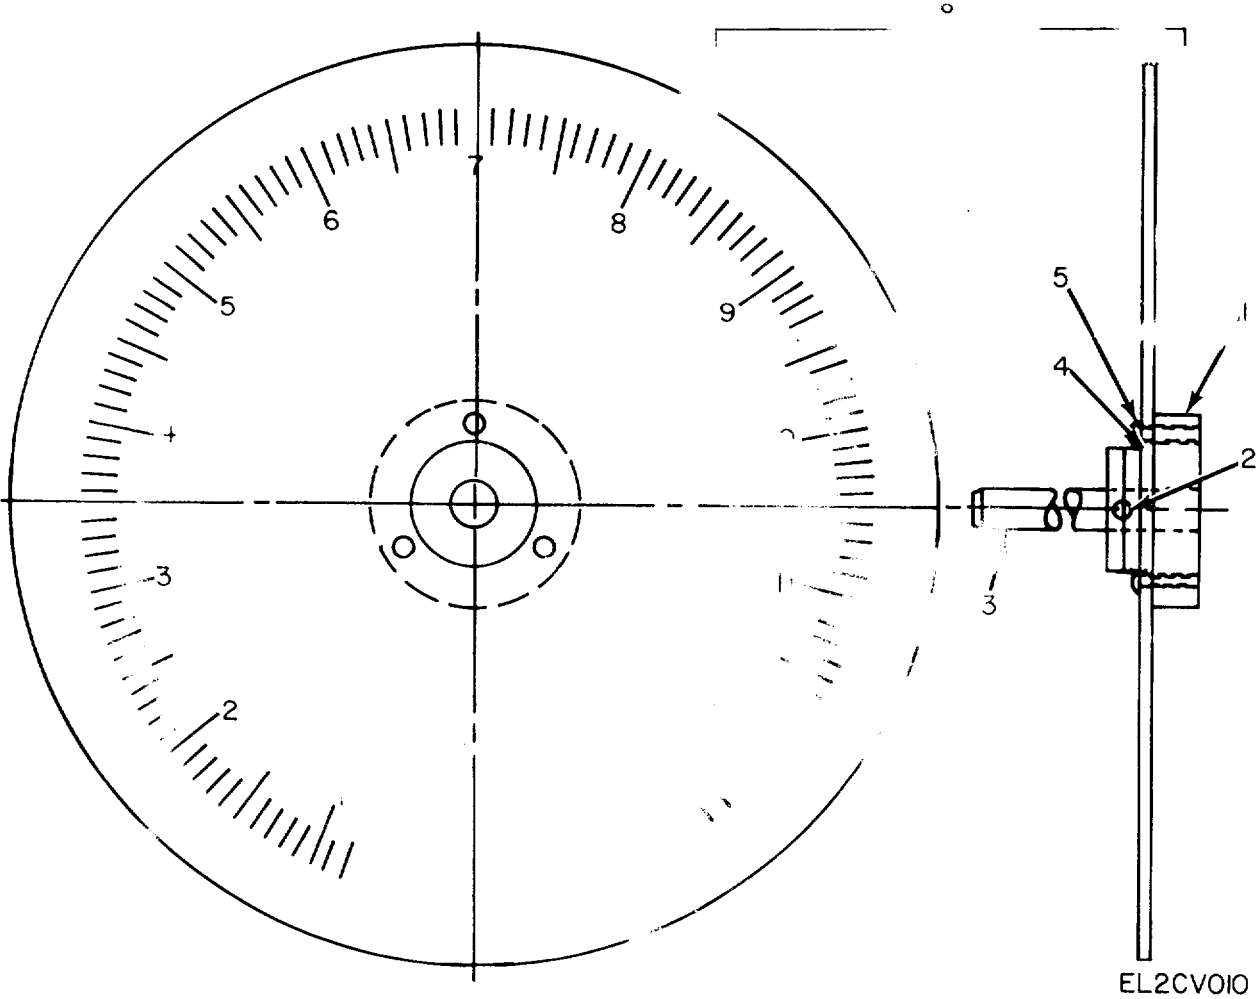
Generator, Signal SG-321B/U, Coarse Tuning Assembly.
